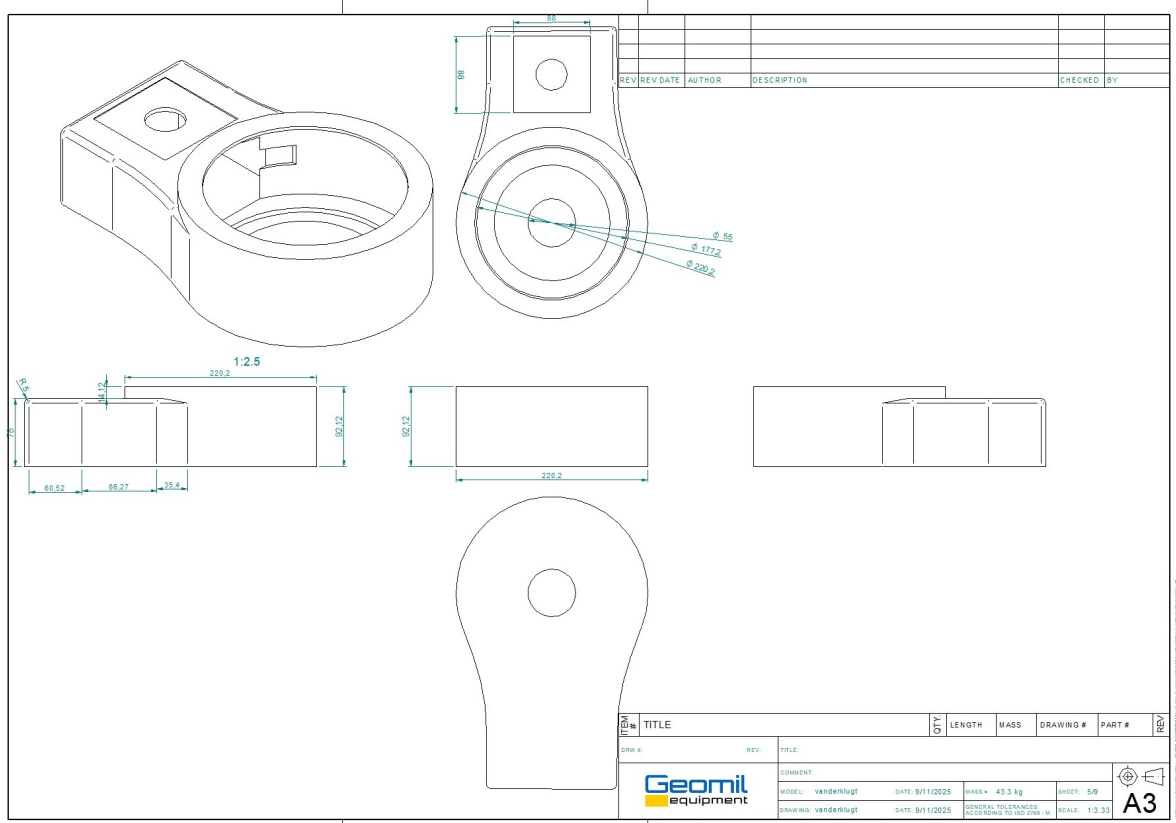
Technical Drawing Of Housing Around Gears And Ellipse.
